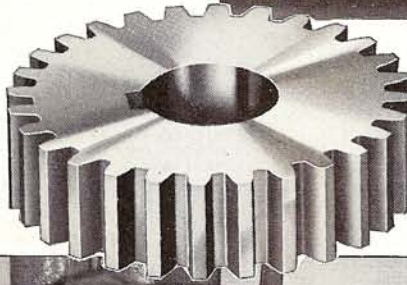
Left. Steel Gear Precision Cut from the Solid on Automatic Gear Hobbing Machine.
